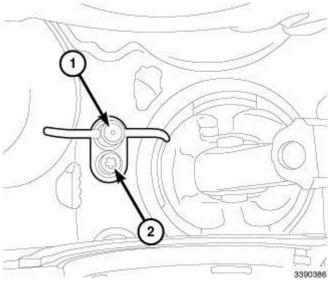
Oil Jet & Retaining Bolt Courtesy of CHRYSLER GROUP, LLC
